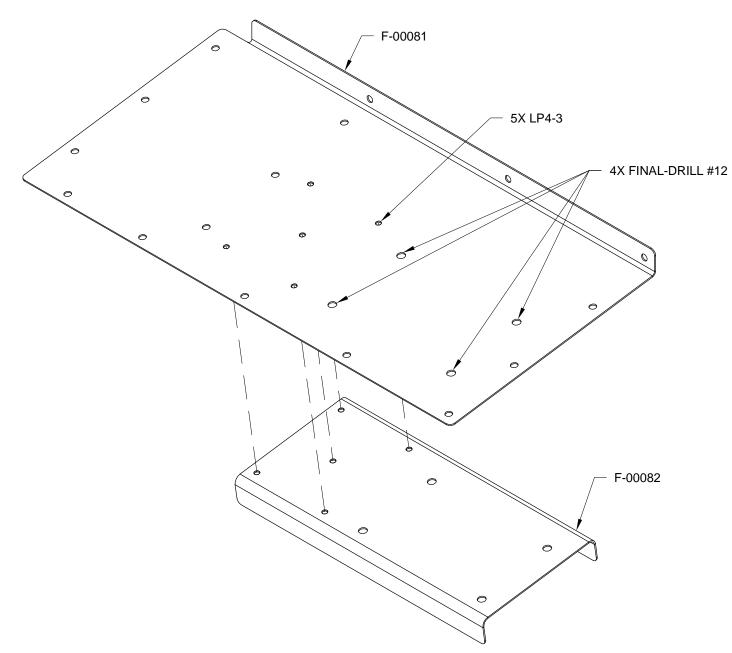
BAGGAGE FLOOR ASSEMBLY
